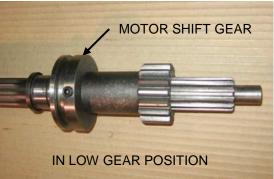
MOTOR SHIFT GEAR POSITIONS
